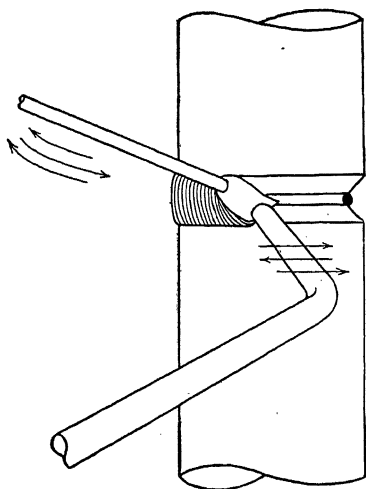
Horizontal pipe weld, Lindeweld process.
